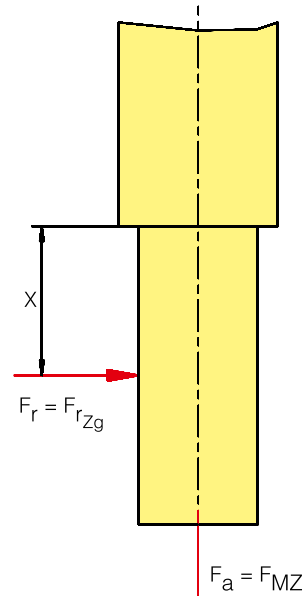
Mechanical drive for a vertical shaft (straight spur gears)
